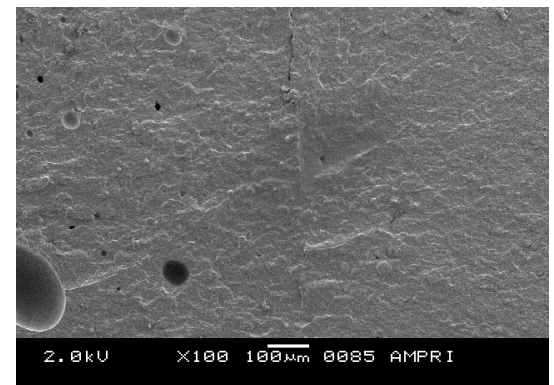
Fracture surface between layer 2 and layer 3
